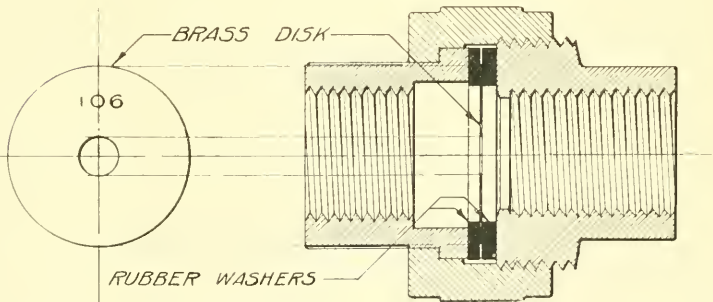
Sectional view of union in outlet pipe, with disk and washers in place.
